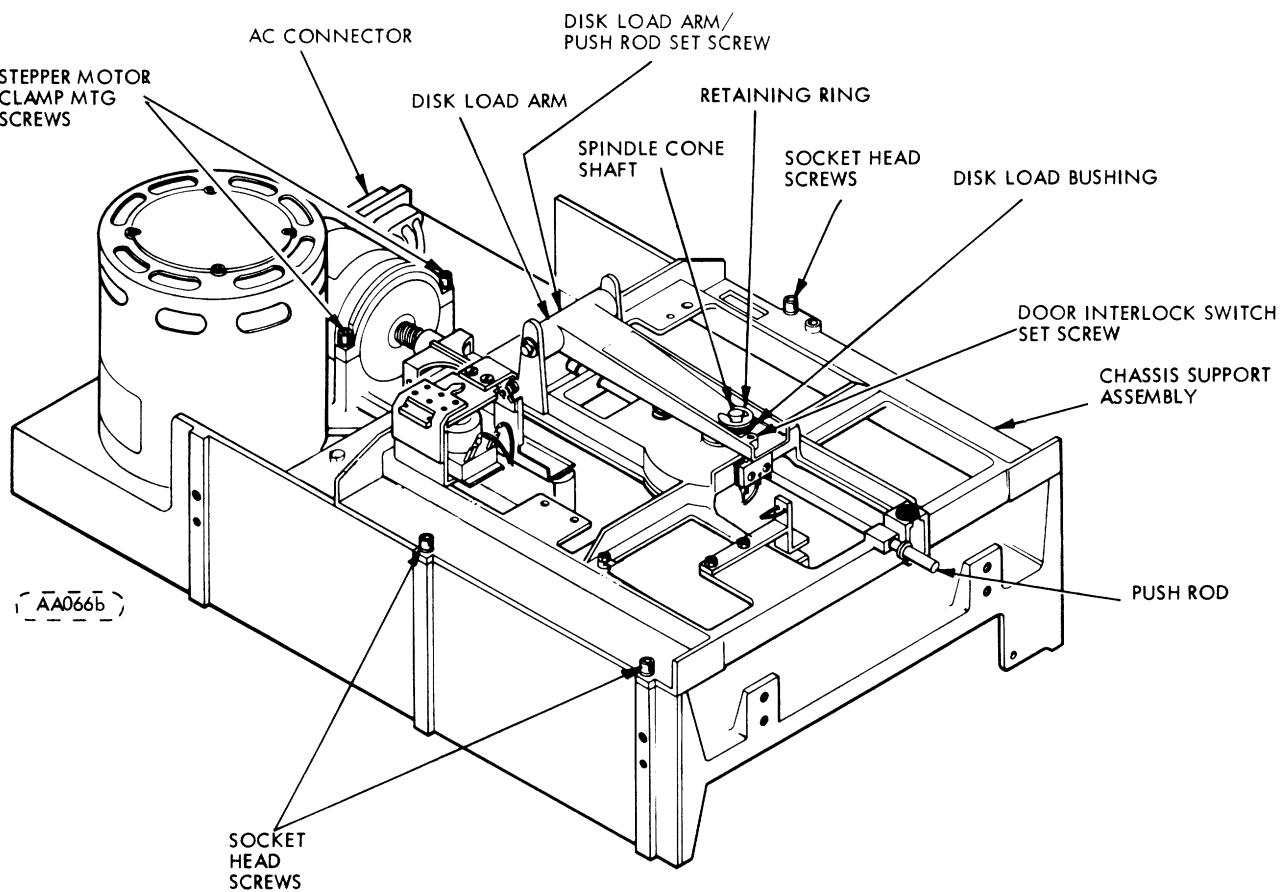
CHASSIS BASE ASSEMBLY
